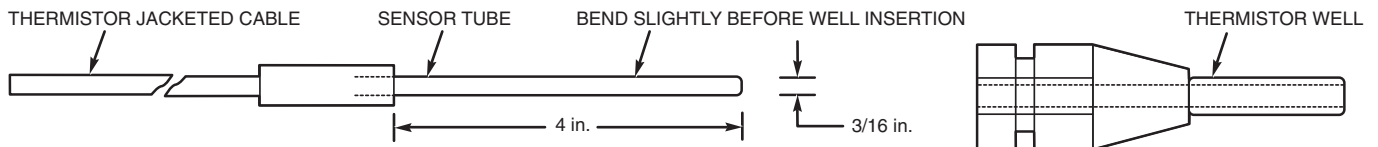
Thermistor Replacement (T1, T2, T5, or T6)
